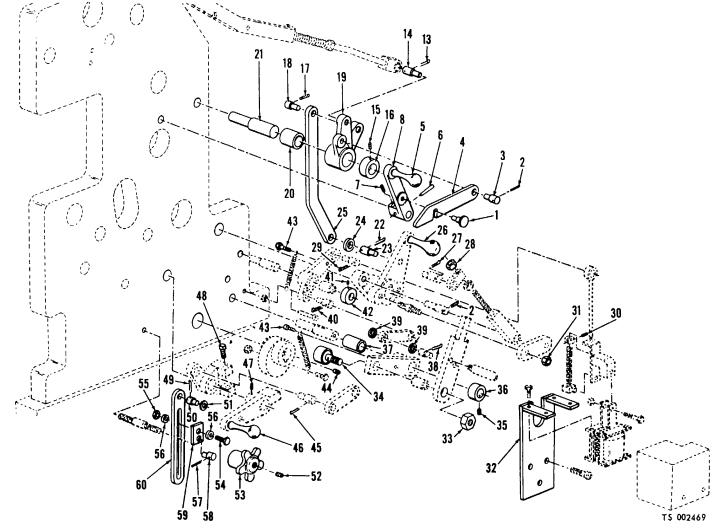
Throw-off assembly (Sheet 1 of 2).
